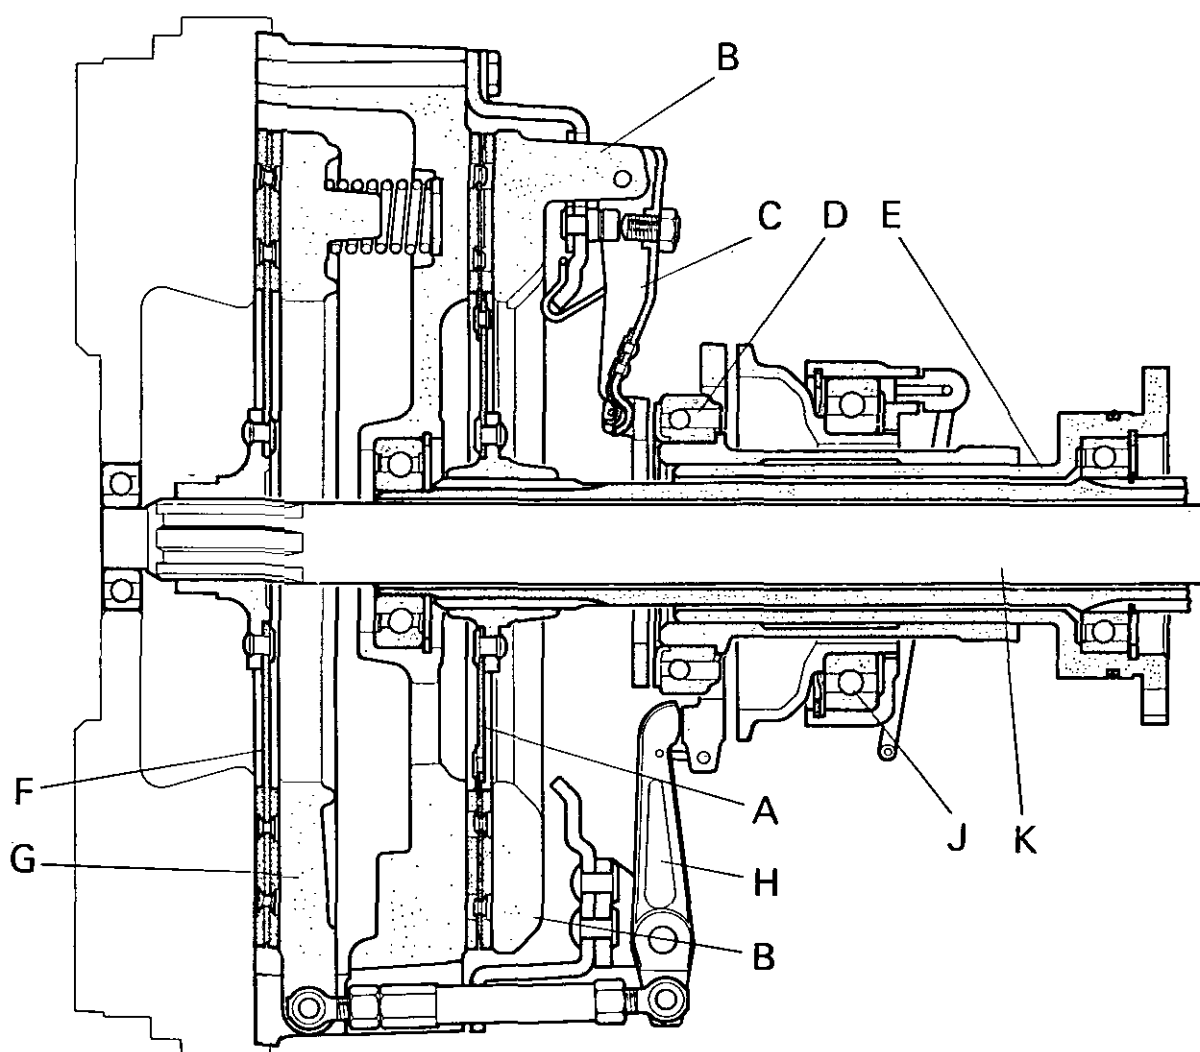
SECTIONAL ARRANGEMENT OF DUAL CLUTCH
